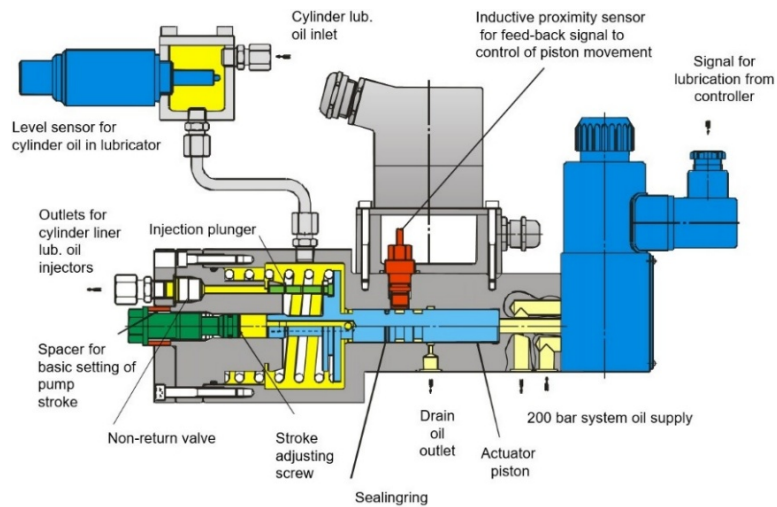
Lubricator for lubrication system LUBECS from MAN B&W
